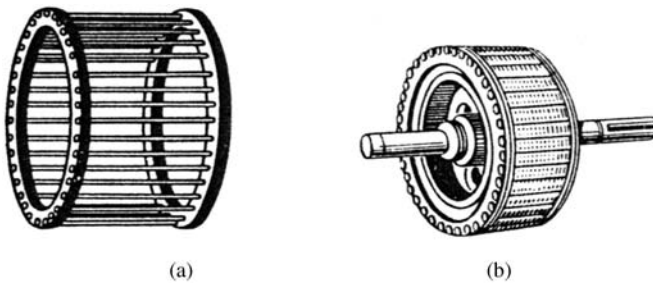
Squirrel-cage rotor induction machine: (a) squirrel cage of rotor; (b) squirrel cage rotor [42].
